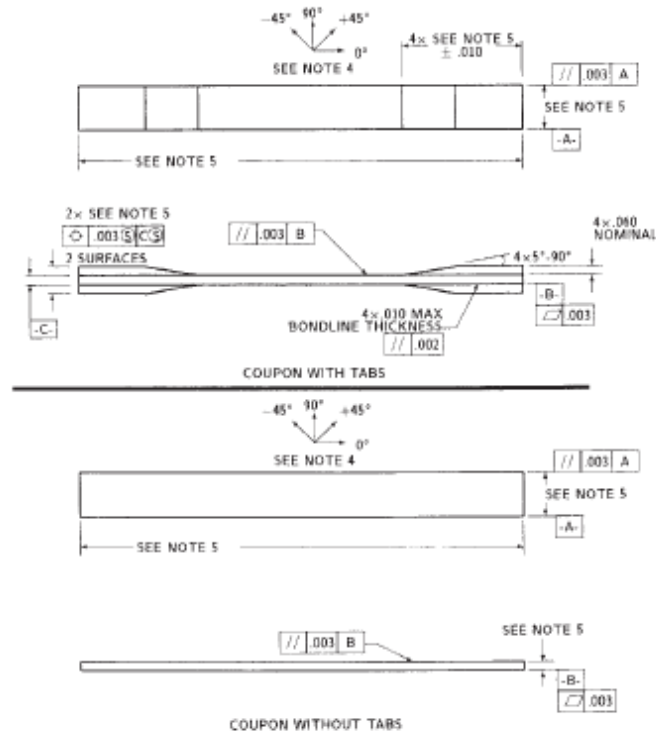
Tension Test Specimen Drawing (inch-pound)
